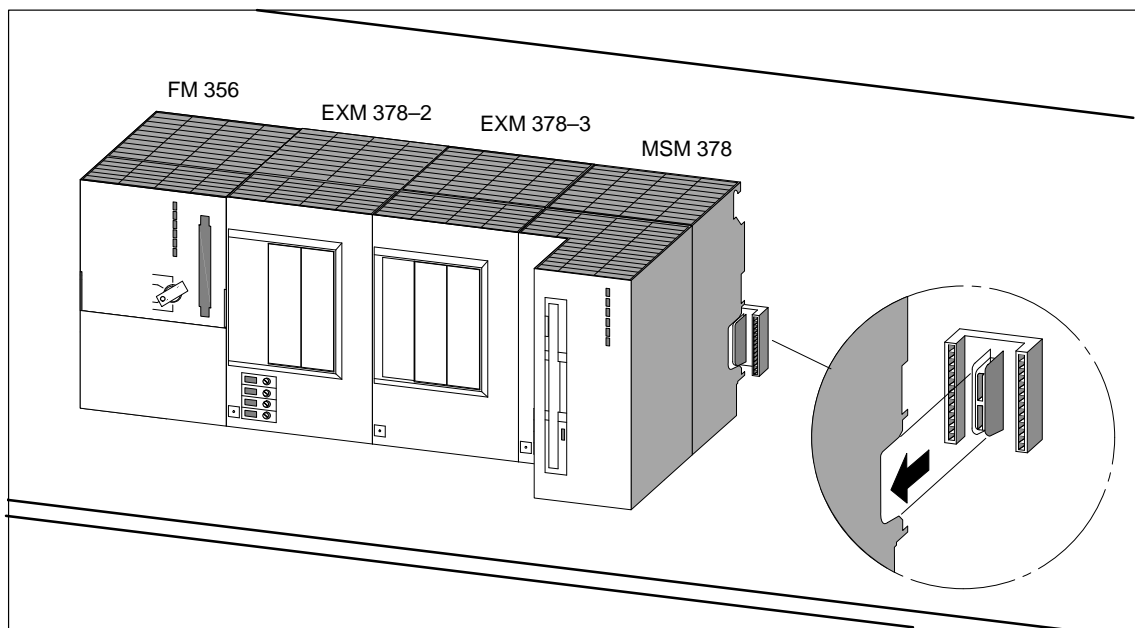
Plugging a Bus Connector onto a Module Assembly
